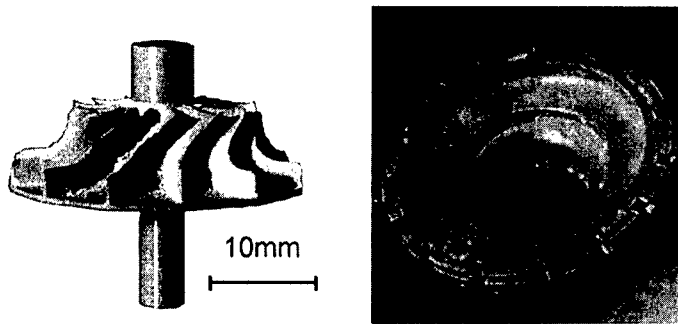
Silicon nitride turbine engine parts fabricated with Mold SDM: turbine-rotor (Left), inlet nozzle (Right).
